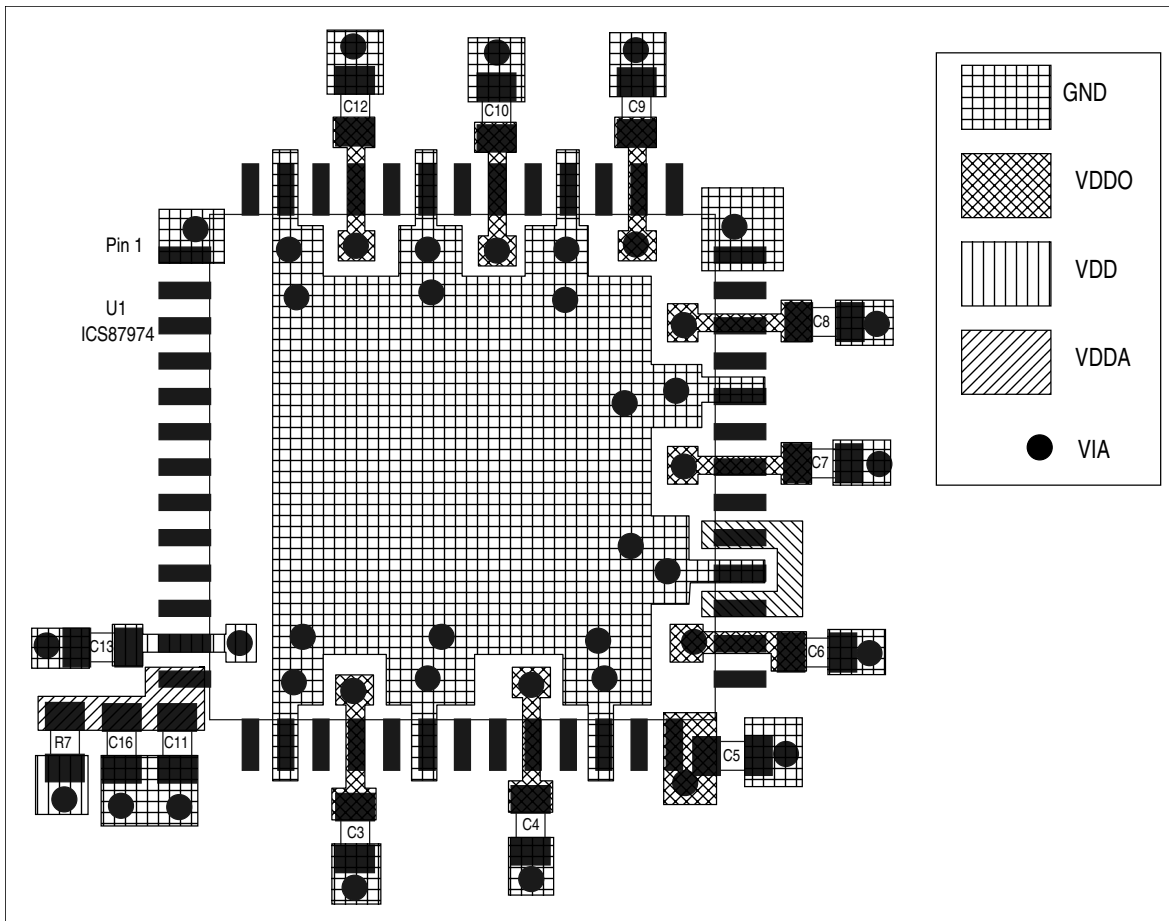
B. PCB BOARD LAYOUT FOR ICS87974I
